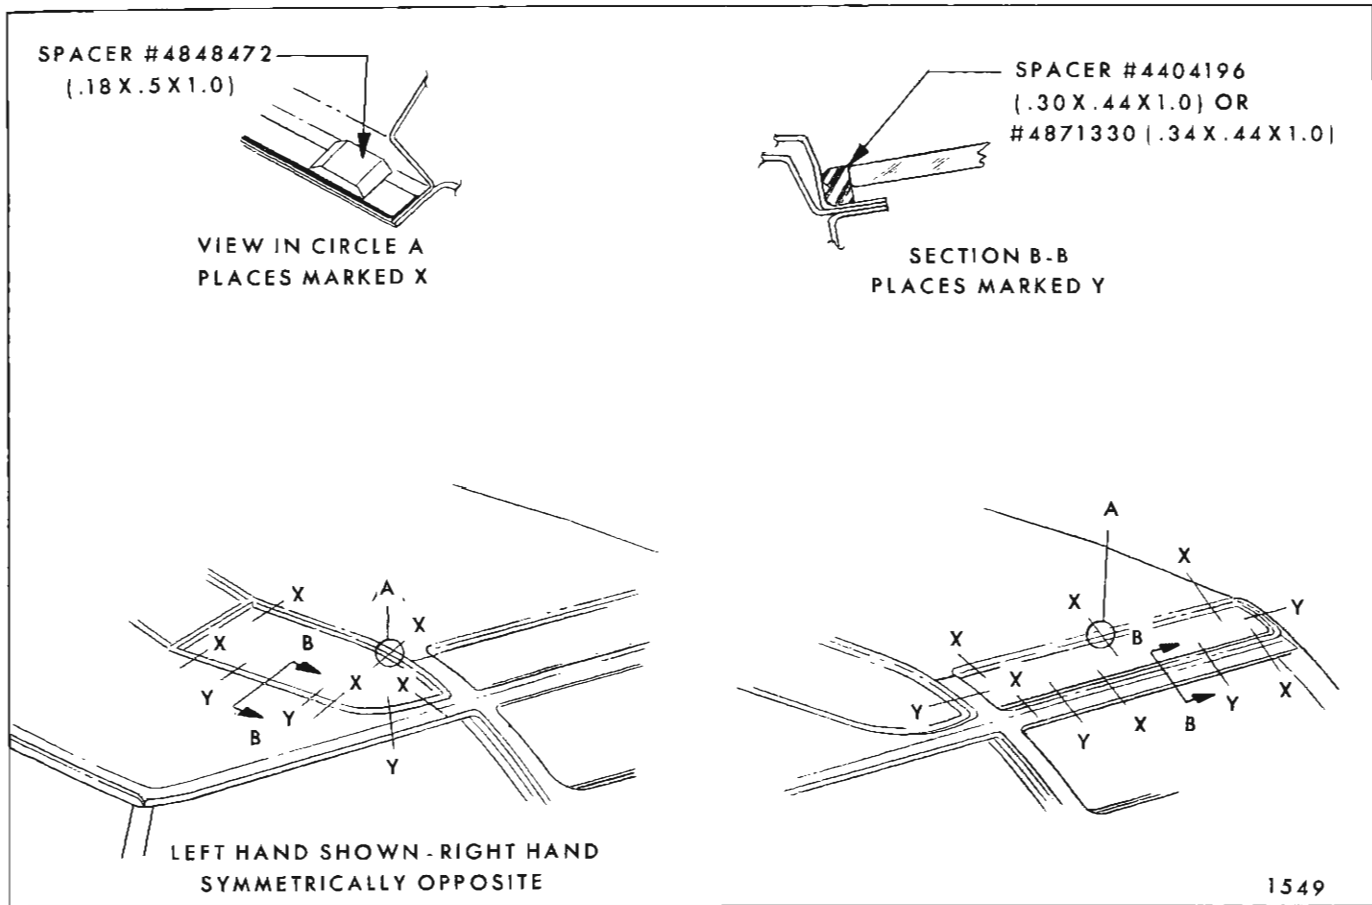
E18—Front and Side Skylight Rubber Spacer Installation
